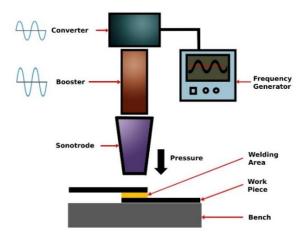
Schematic representation of the ultrasonic welding process
